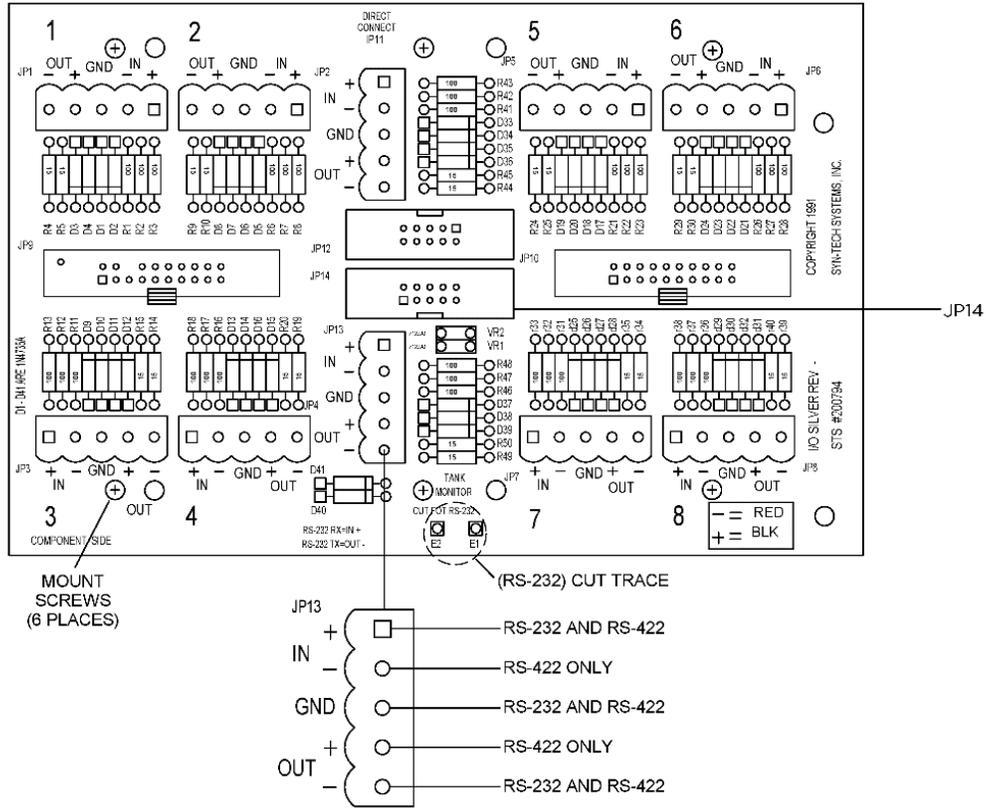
I/O Silver Board for Tank Monitor Interface Kit
